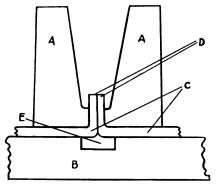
WELDING A SHEET ME-TAL SEAM: A, A, CLAMPS; B, TABLE; C, WORK; D, EDGES TO BE WELDED; E, AIR SPACE, MAY BE FILLED WITH ASBESTOS
